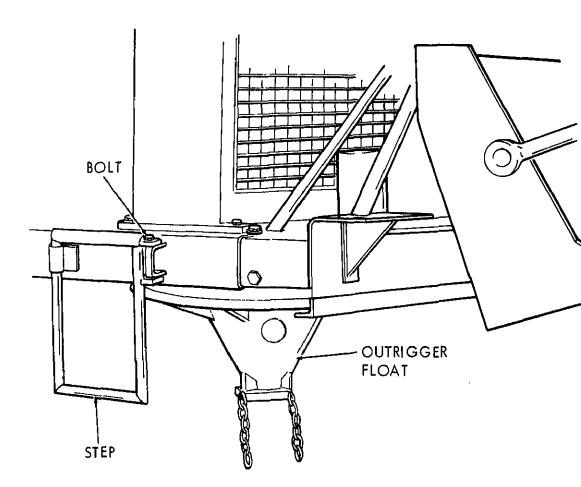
Stowed outrigger floats, removal and installation (sheet 1 of 2).
